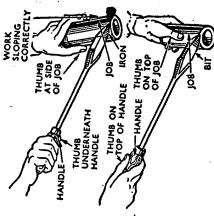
Method of holding soldering below, wrong method. The thumb should be held under the handle of the iron as iron and work. Above, correct method, explained in the text.
